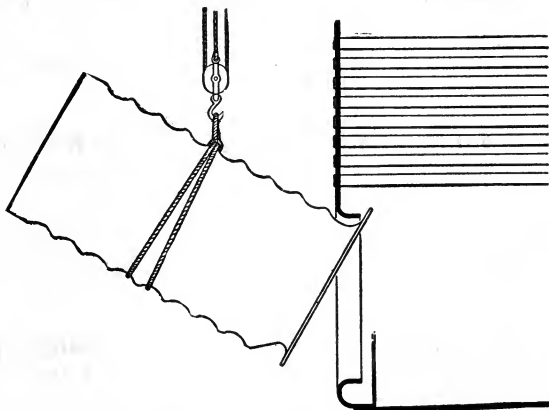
,145.—Method of removing a cylindrical furnace from its position in the boiler.
